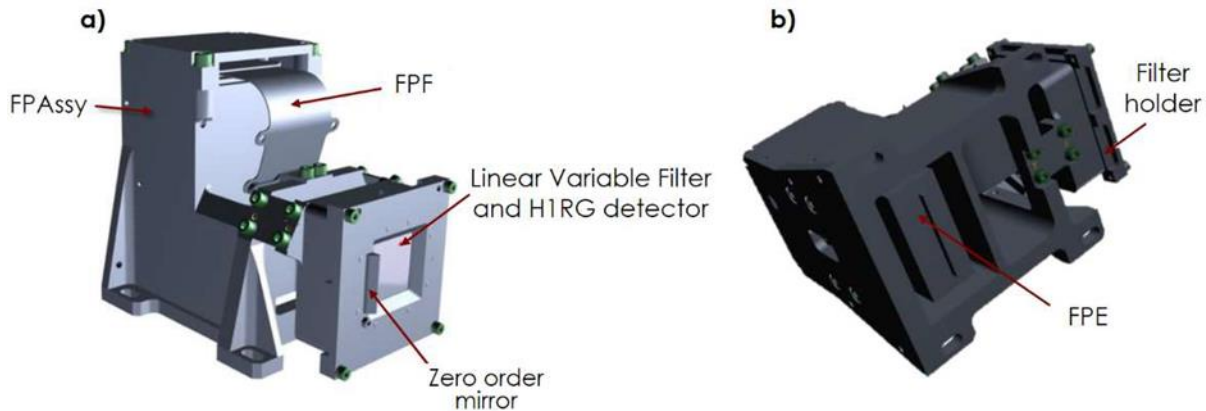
Views of the VIS-NIR FPU and its parts: a) frontal view, b) rear view
